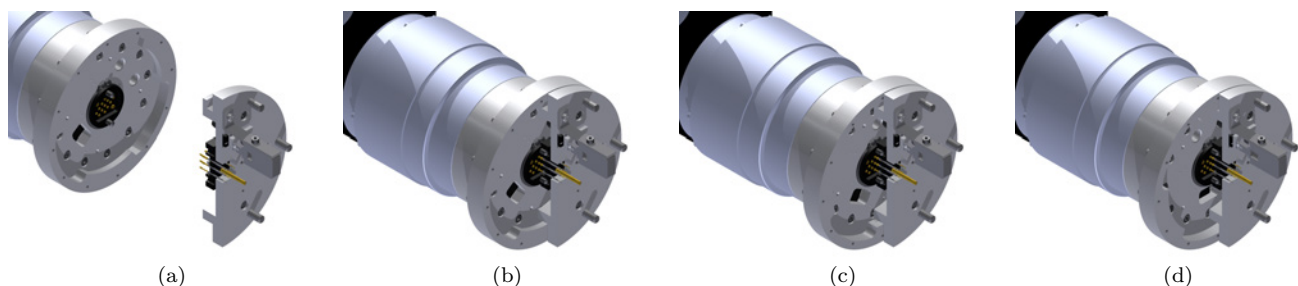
Inserting motion: (a) positioning the attachment and fixture, (b) inserting the attachment into the fixture, (c) rotating the attachment, (d) pushing the pins to lock rotating motion.
